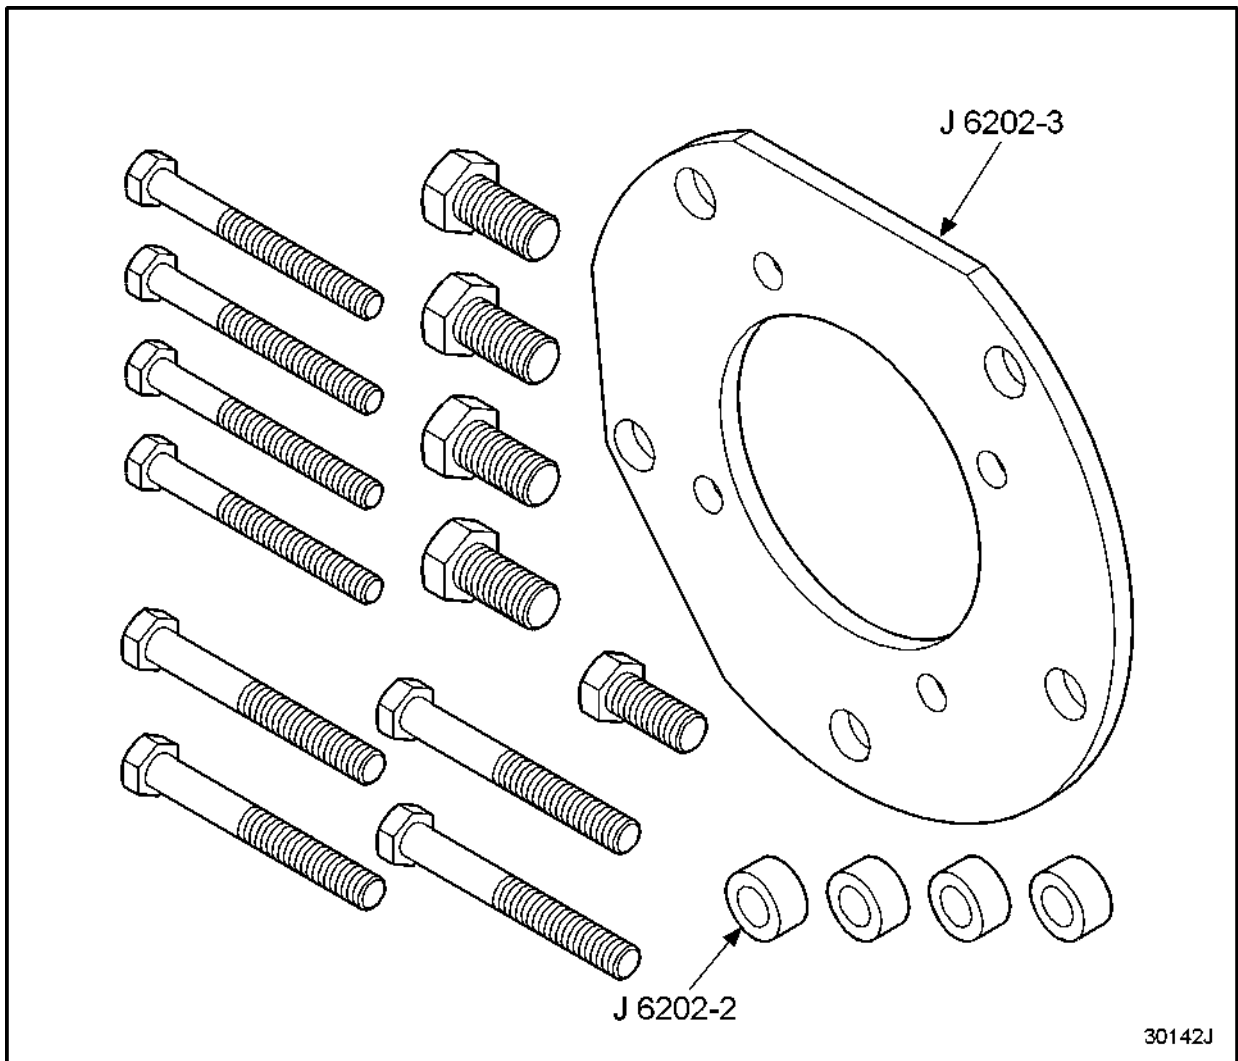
RR Cam Gear Puller Adapt In Chassis, J 6202-01
